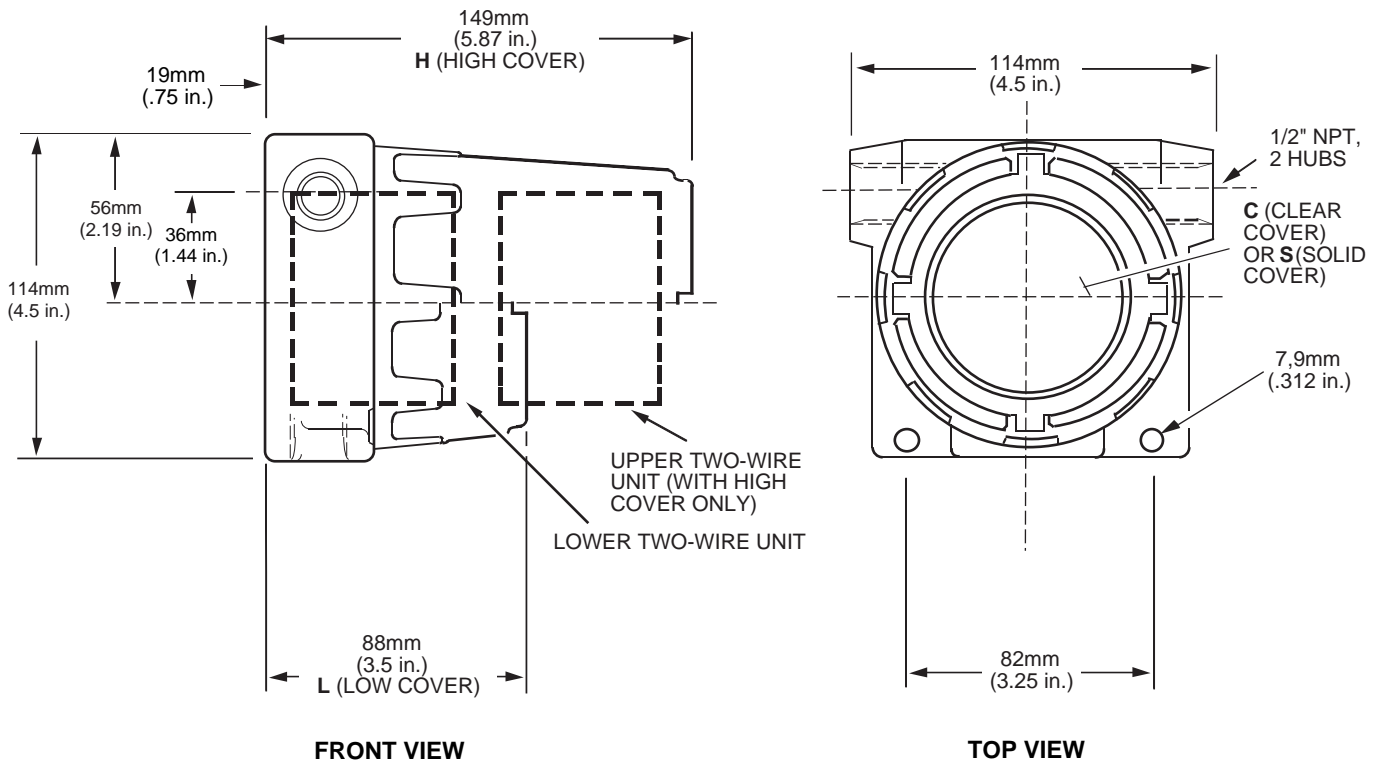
The Dimensions of the explosion-proof housing for the TDY unit.
